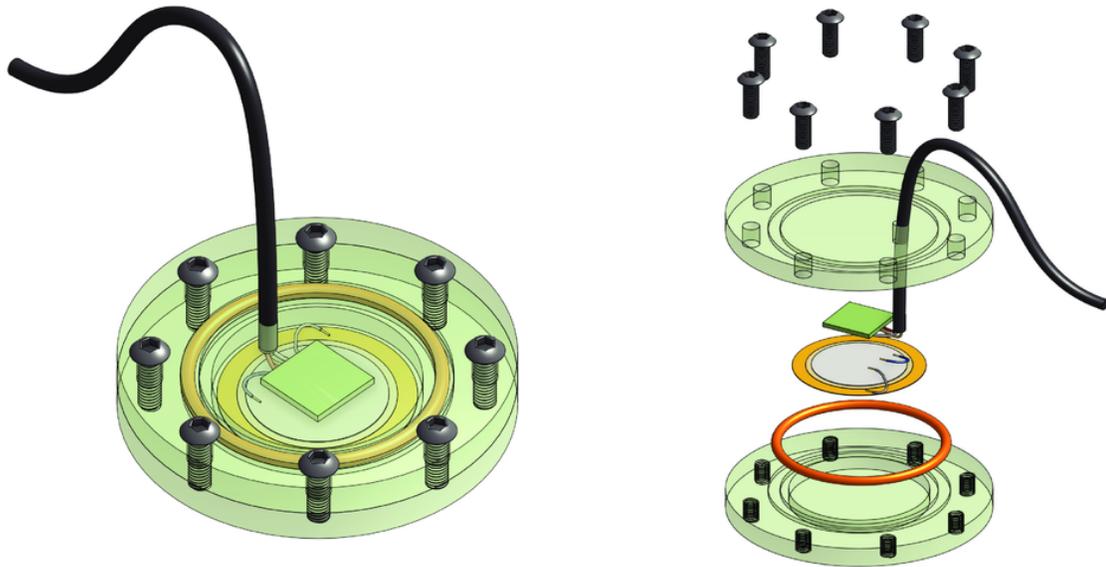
Hydrophone prototype (v1), assembled and exploded views
